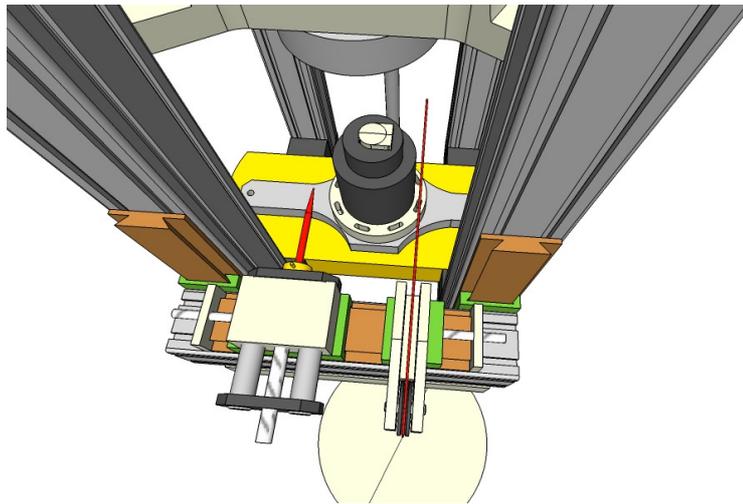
Spindle drive and pulley for generating side forces and bending moments
